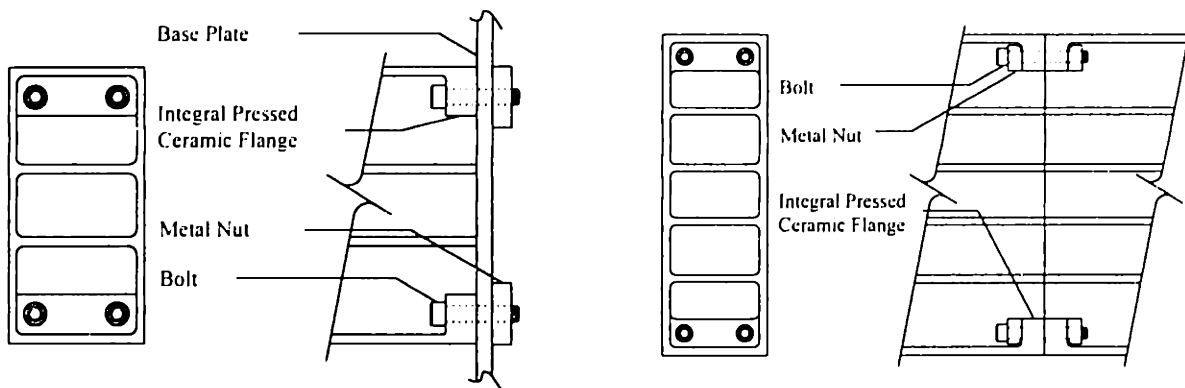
Diagrams of two bolted assemblies. A beam endbolted to a plate (left) and two beams bolted end to end (right).
